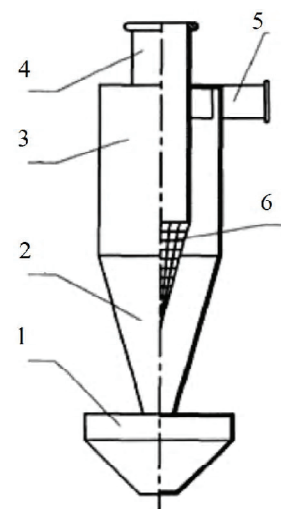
Discharge electrodes are located in the cylindrical part of the cyclone: 1 – bunker; 2 – cone; 3 – cylindrical part; 4 – exhaust pipe; 5 – inlet; 6 – corona electrode.
